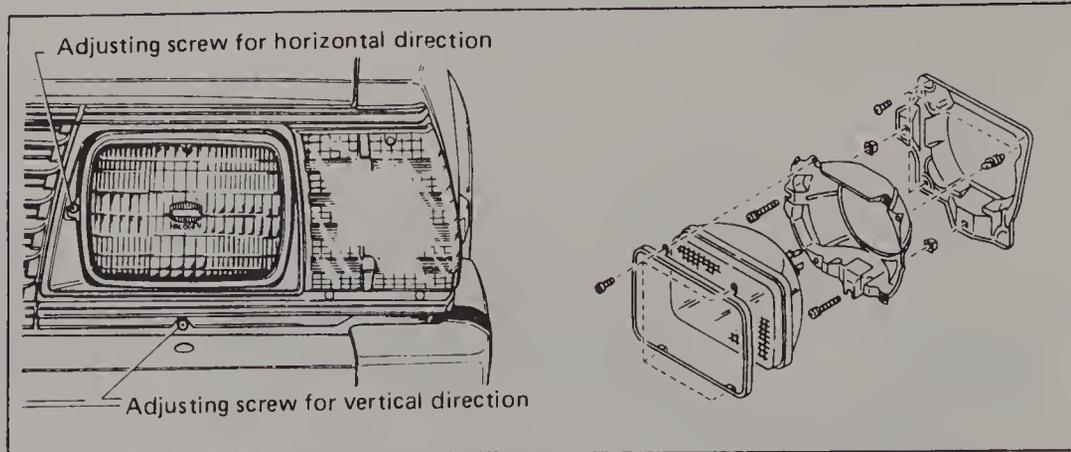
Typical single headlight components – exploded view (Sec 10)
